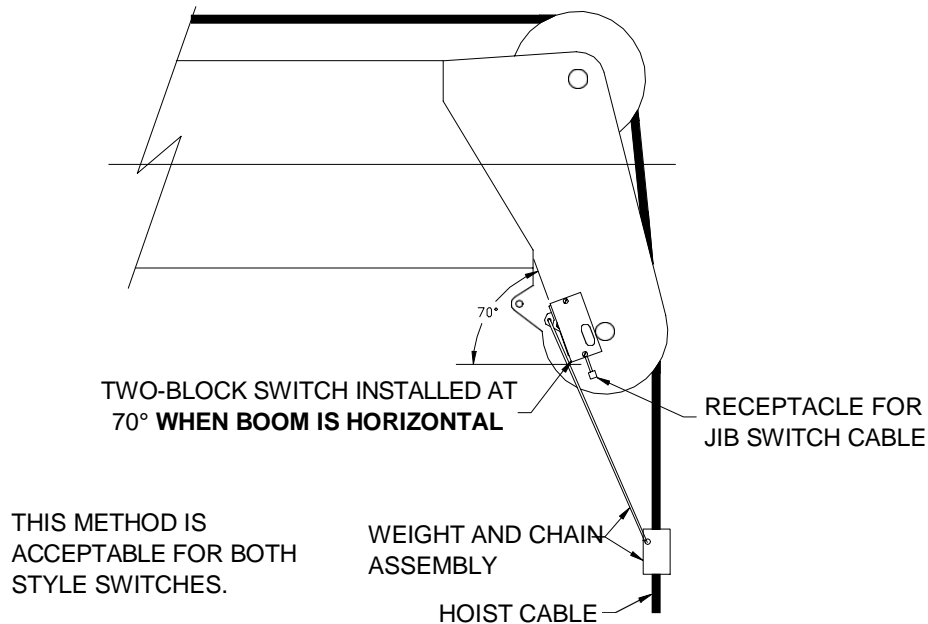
EXAMPLE OF RIGHT SIDE MOUNT
